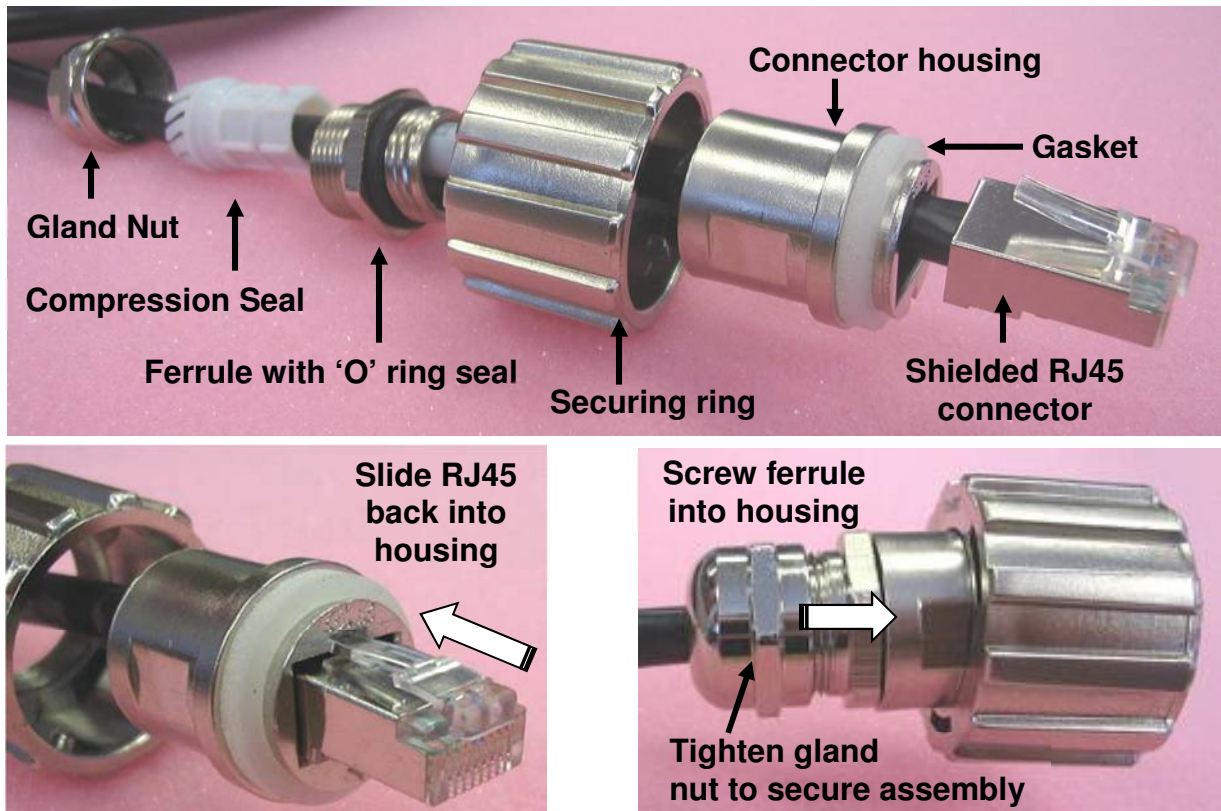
RJ45 Cable connector Conec “Push fit” Style
